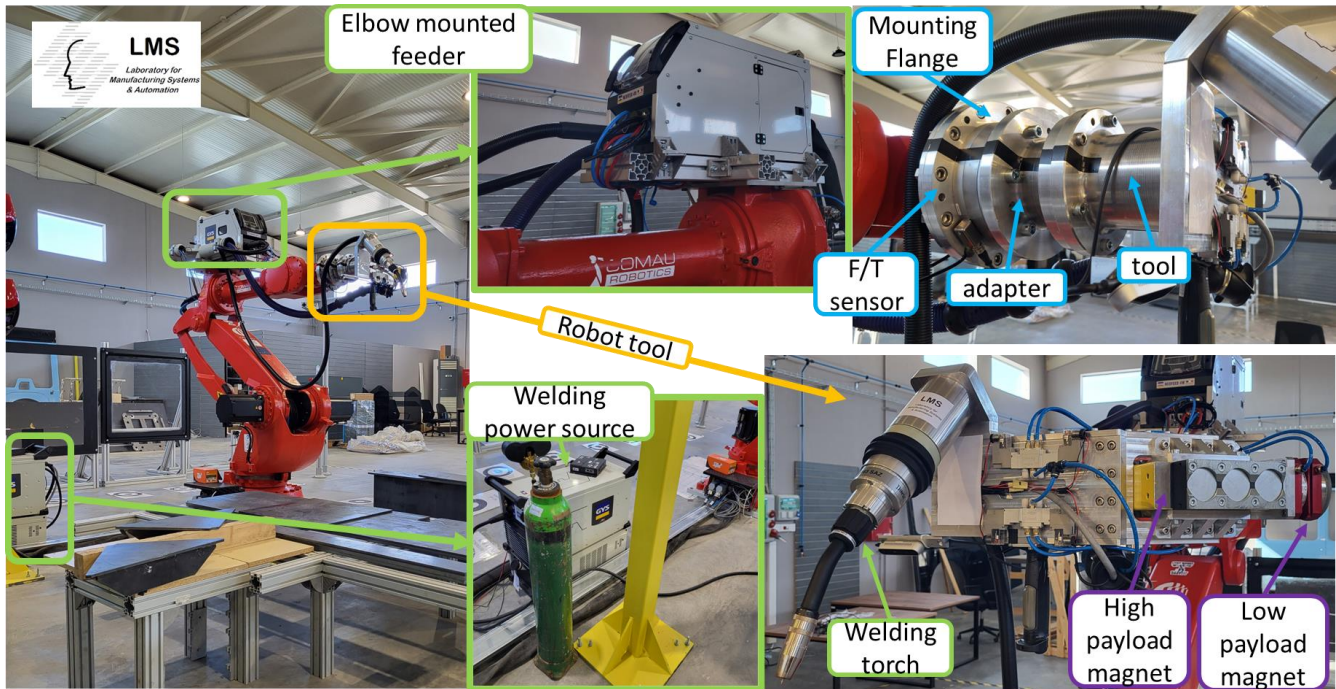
Robot tool system (welding system and magnetic gripper and F/T sensor)
